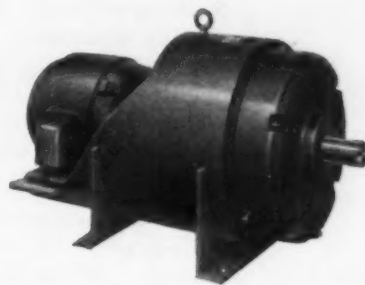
Present Weld design in Steel. Costs 50% less. Further saves shipping costs "prepaid" by manufacturers, using the product.
